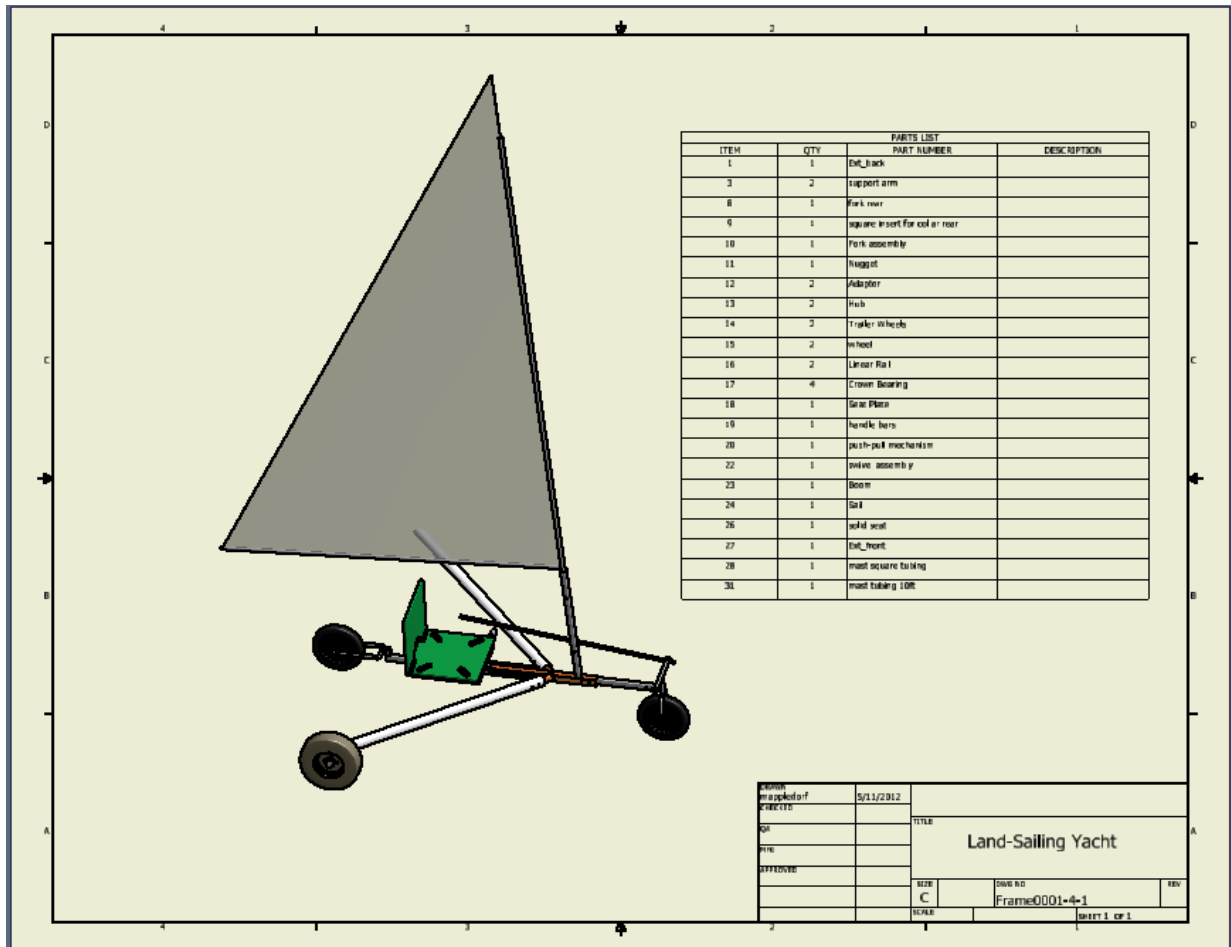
CAD Drawing of the Assembly of the Land-Sailing Yacht.
